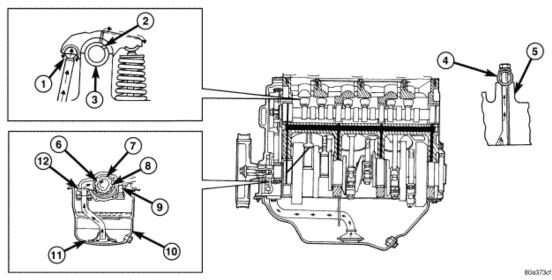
Identifying Engine Lubrication System Courtesy of CHRYSLER LLC
